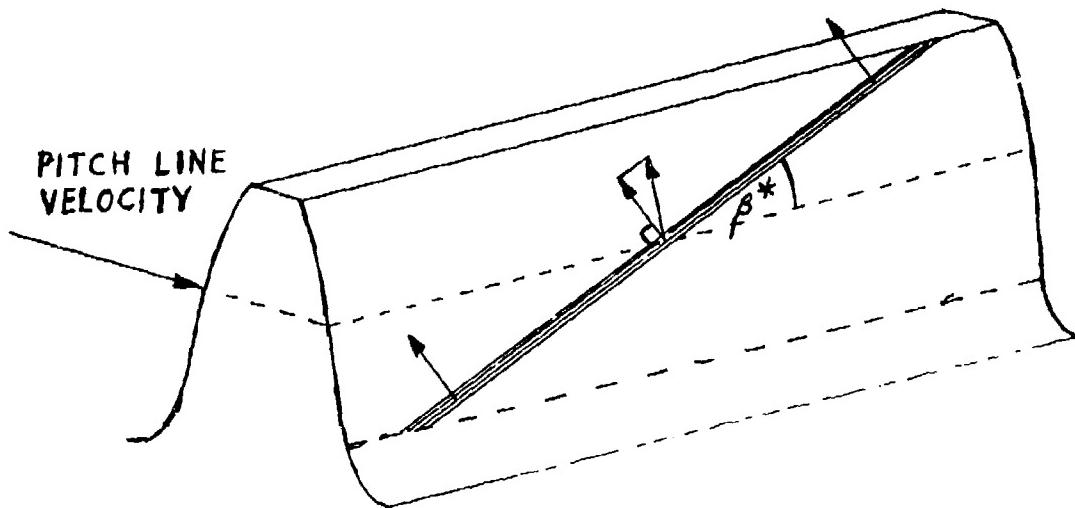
Movement of the contact line over a driving helical involute tooth that generates the oil film
